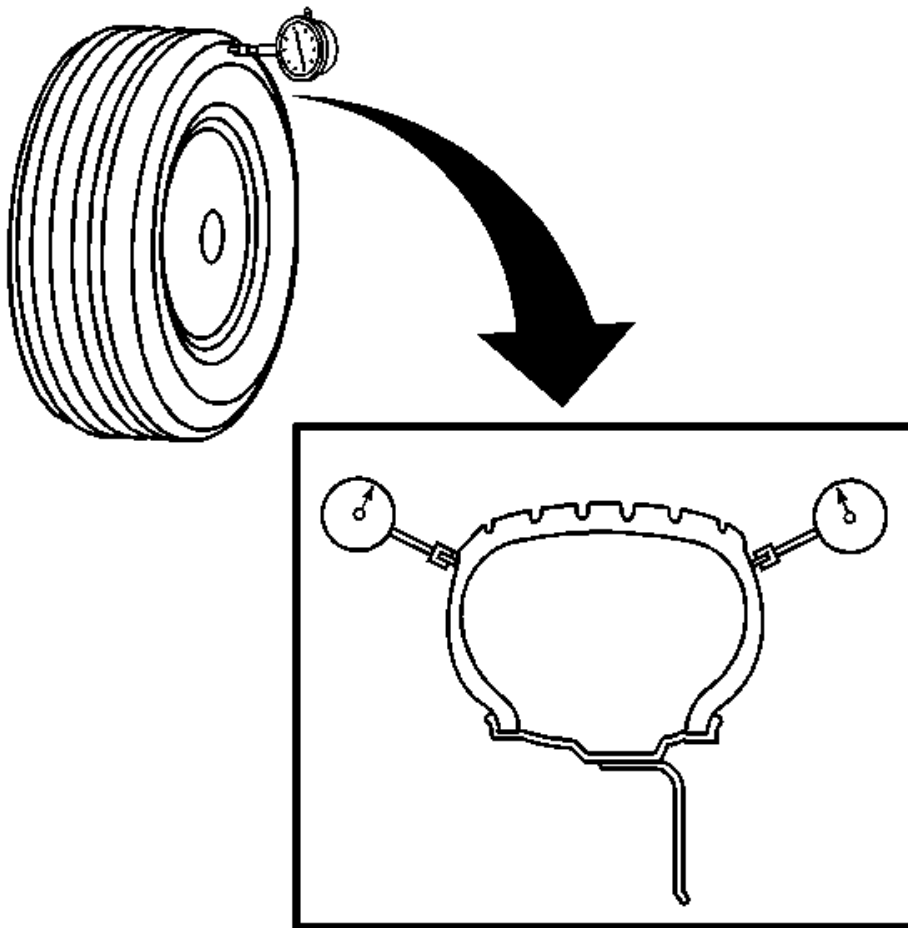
Measuring Tire & Wheel Assembly Lateral Runout
